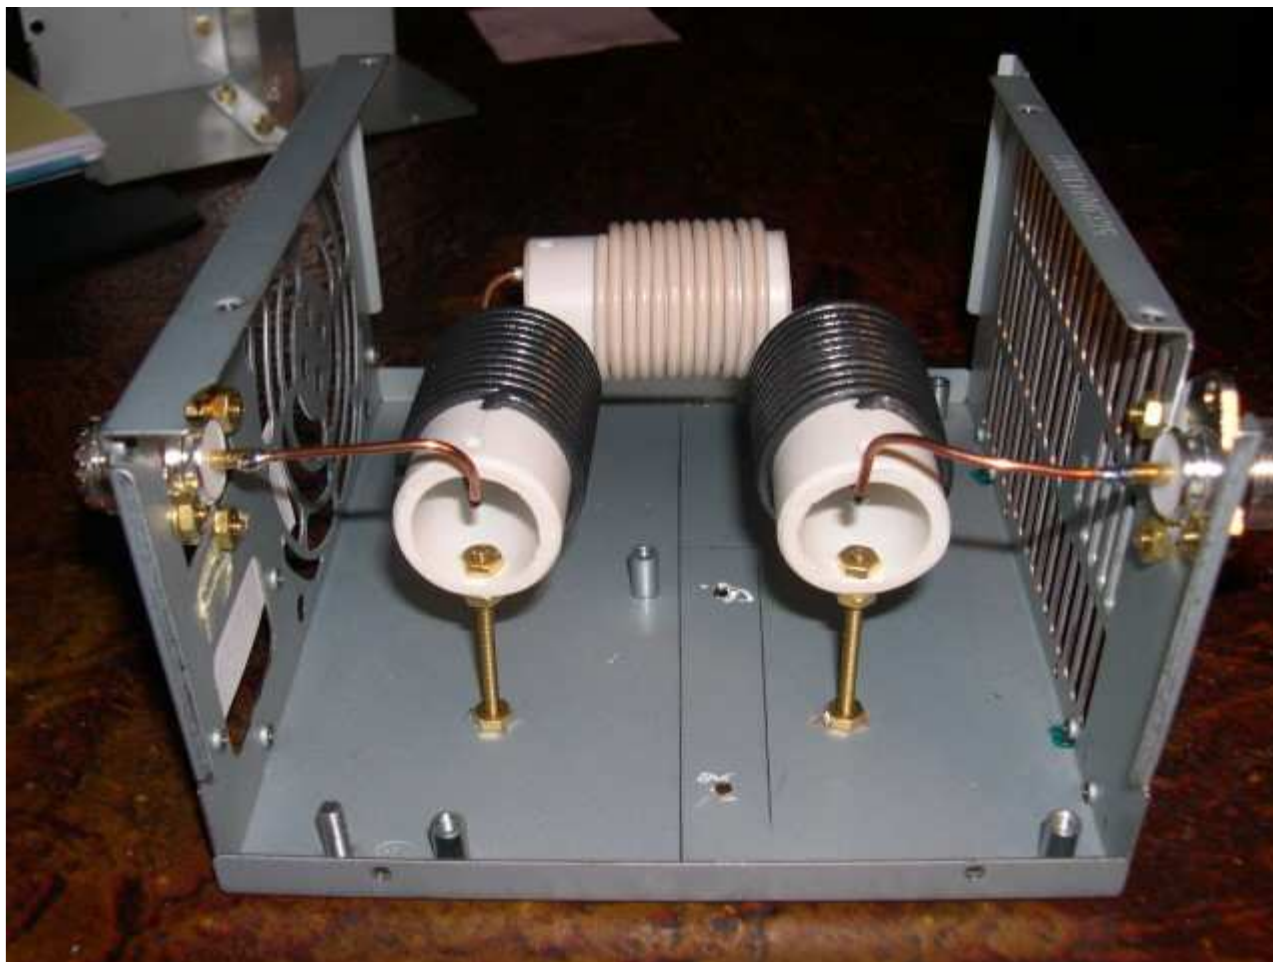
Connector end of filter showing the input and output wire leads made from the coil wire. Be sure to leave enough wire for the leads when winding the coils. [\[high resolution version\]](#)
